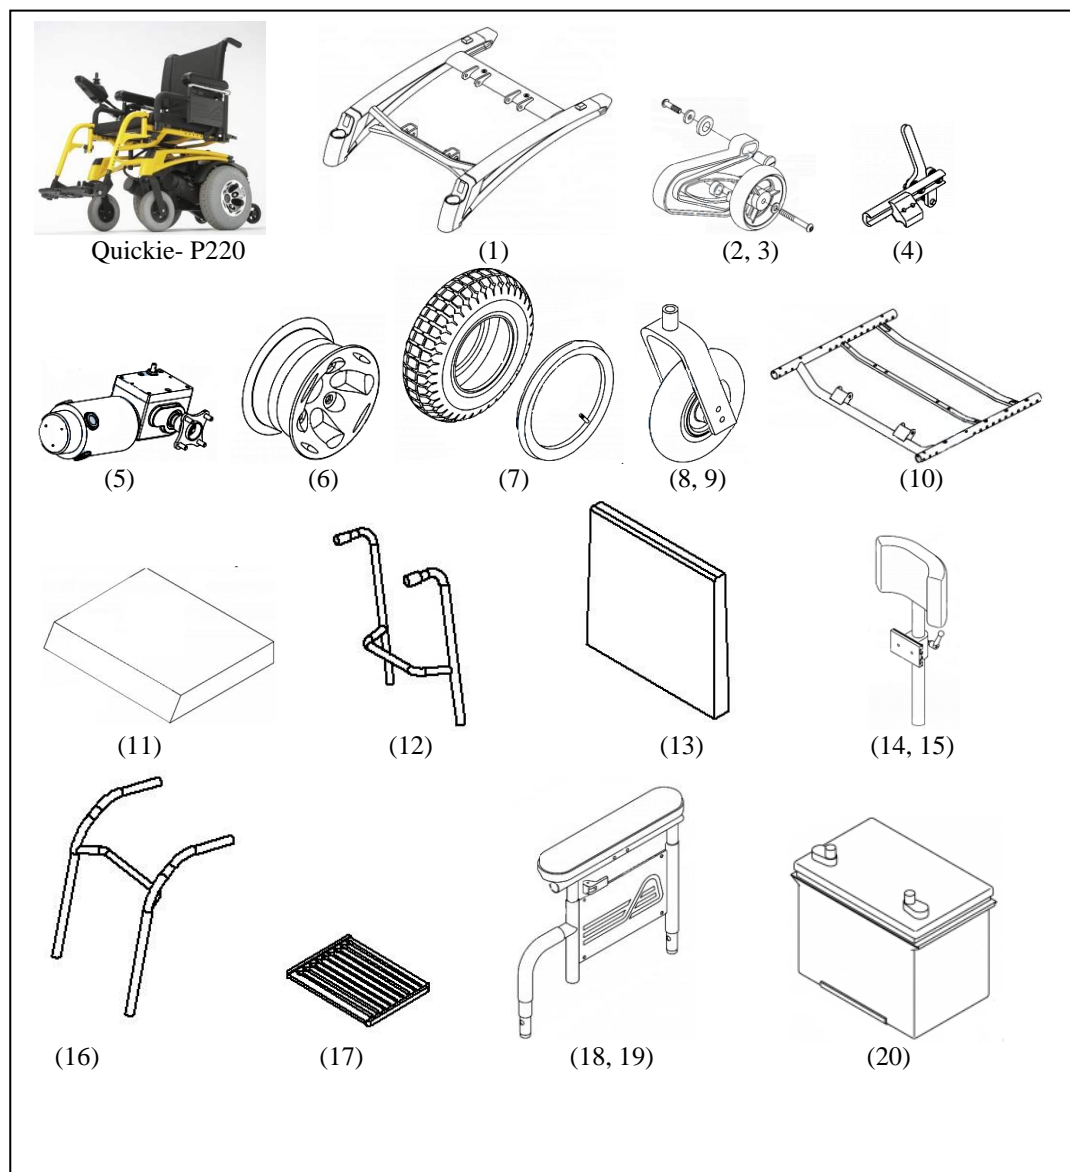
The exploded view of Quickie- P220 wheelchair
